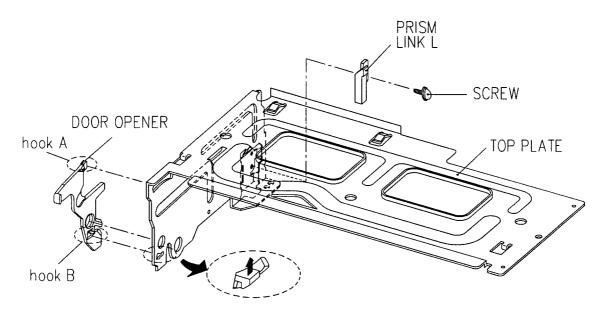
DISASSEMBLY OF THE TOP PLATE
